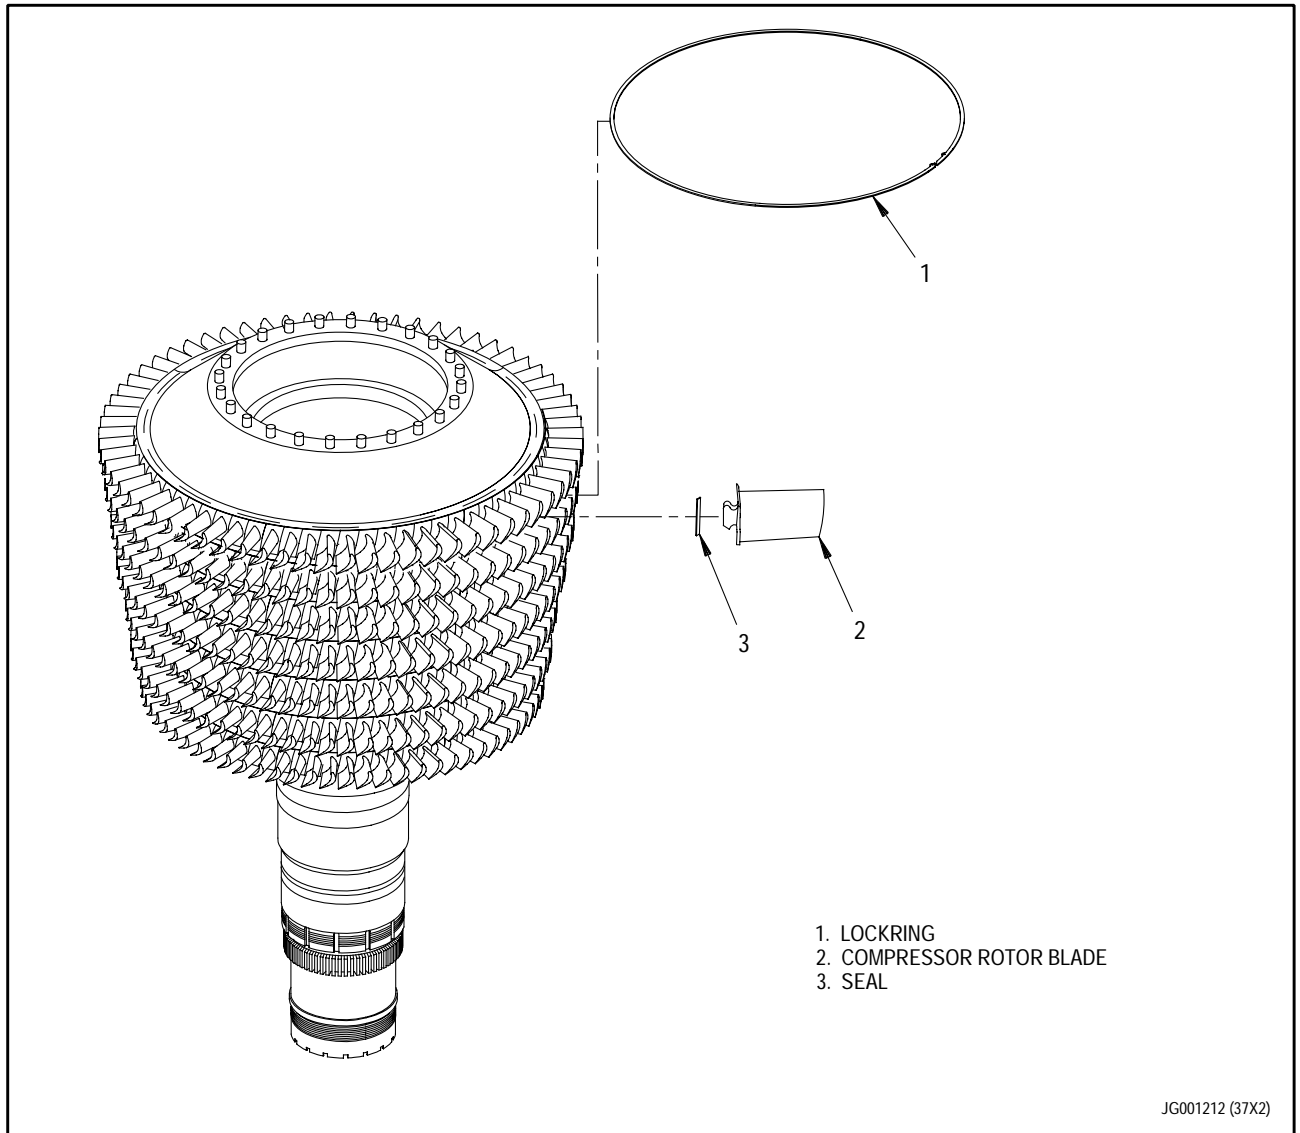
Seventh Stage Compressor Rotor Blades - Removal
